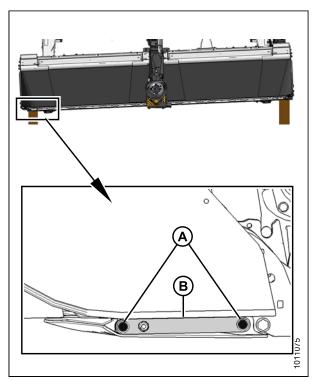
Tilted Mower Conditioner and Cutterbar End Plate
